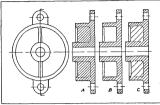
A. TRUE SECTION THROUGH A RIB B THE USUAL METHOD OF DRAWING SUCH SECTION C AN ALTERNATE METHOD
